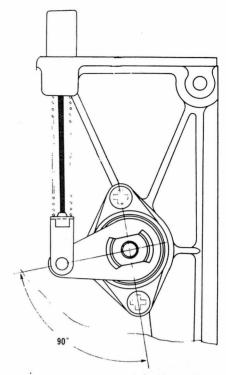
View of clutch release arm with cable adjusted correctly.
